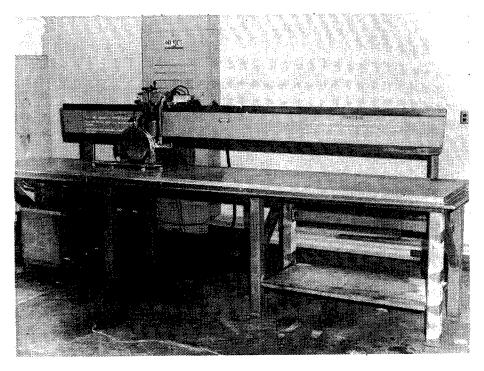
Diamond Abrasive Cutoff Machine Used to Size and Trim B/A1 Sheet and Plate Material.
